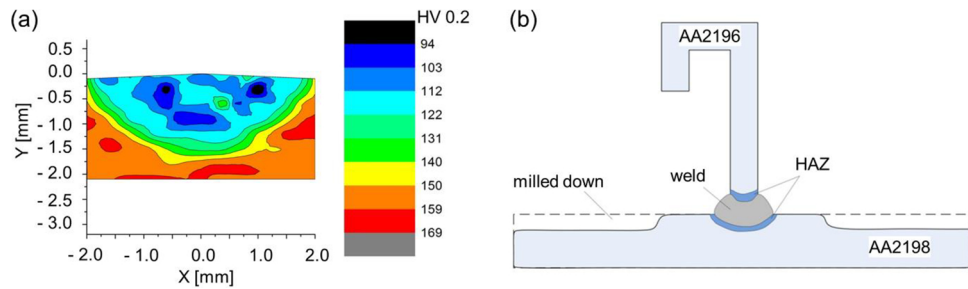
(a) Microhardness map of a simultaneously double-sided CO₂-laser-beam-welded AA2198-AA2196 T-joint (skin under the stringer) and (b) schematic configuration of welded coupon with material to be removed from skin fusion boundary on stringer (socketing) [101].
